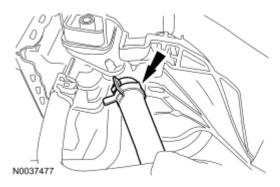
Locating Power Steering Cooler Tube Courtesy of FORD MOTOR CO.
